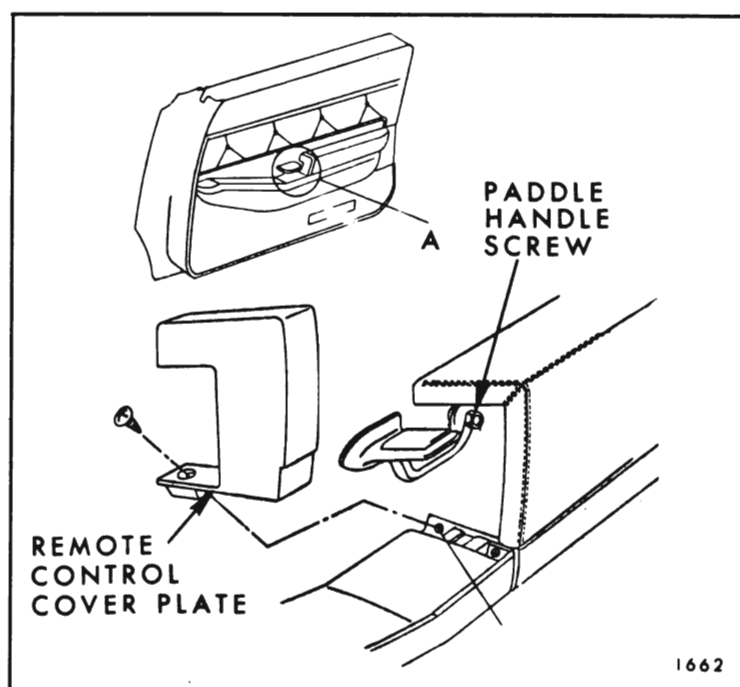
Remote Control Handle and Cover Plate - Front Door Shown - Rear Door Typical
